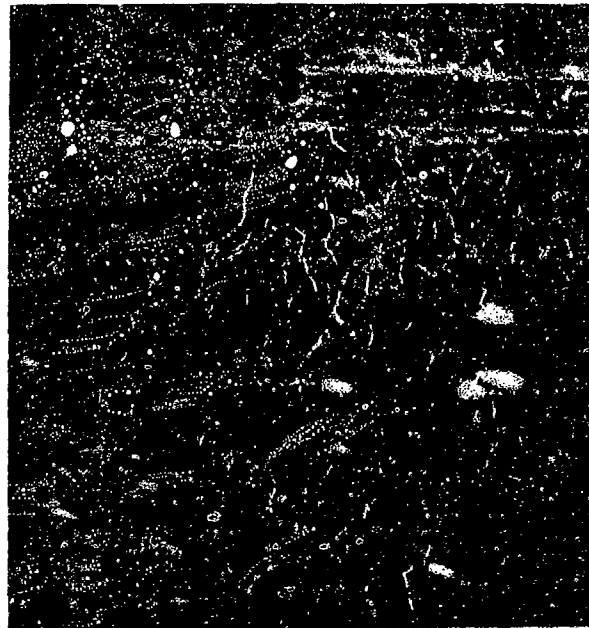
Fatigue region of temper-embrittled AX-110 weld fracture surface, 375x.
